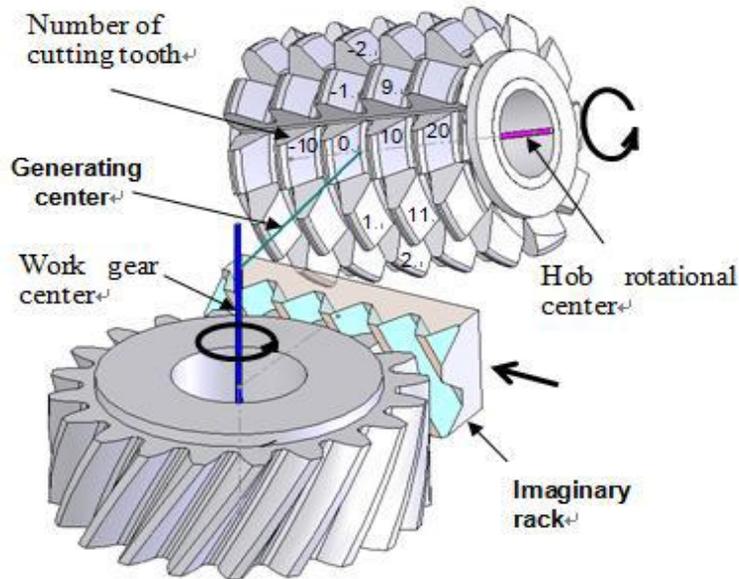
Imaginary rack, Generating center, Number of cutting tooth¹²
